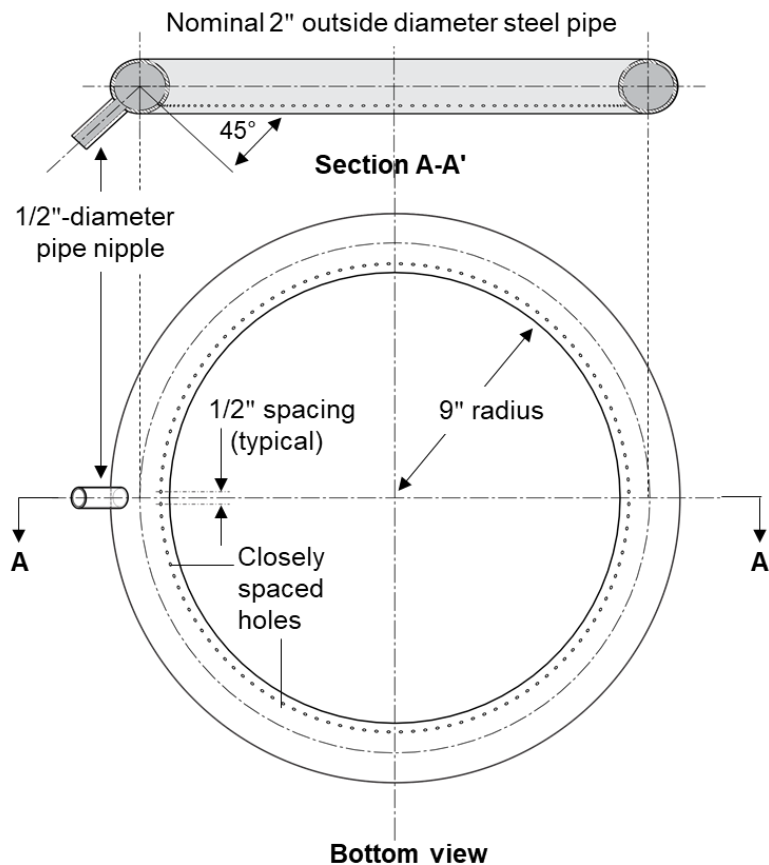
Air ring seal designed to reduce leakage through drill stem bushing.
